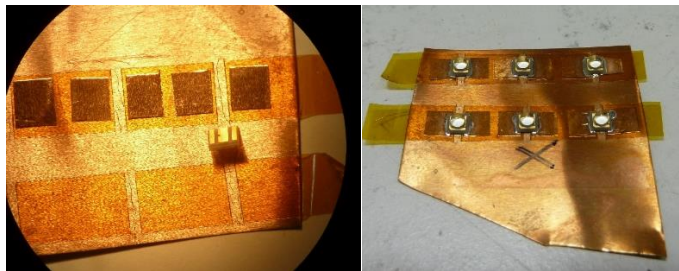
Assembly of the LEDs on a copper sheet before mounting to the heatsink.
